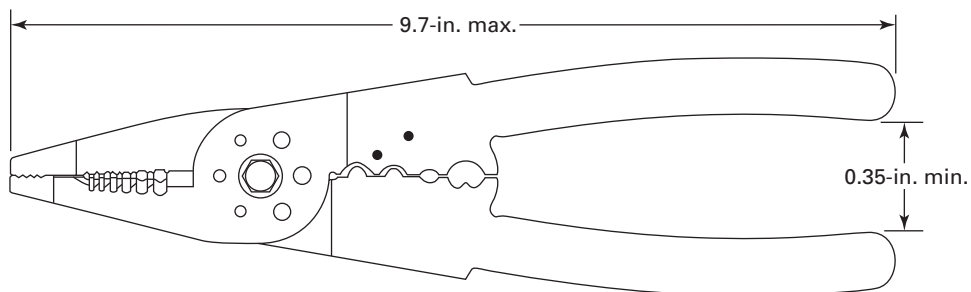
Type II, Class 3, Wire Cutter/Stripper, Large Frame, Strippers Rear of Pivot
